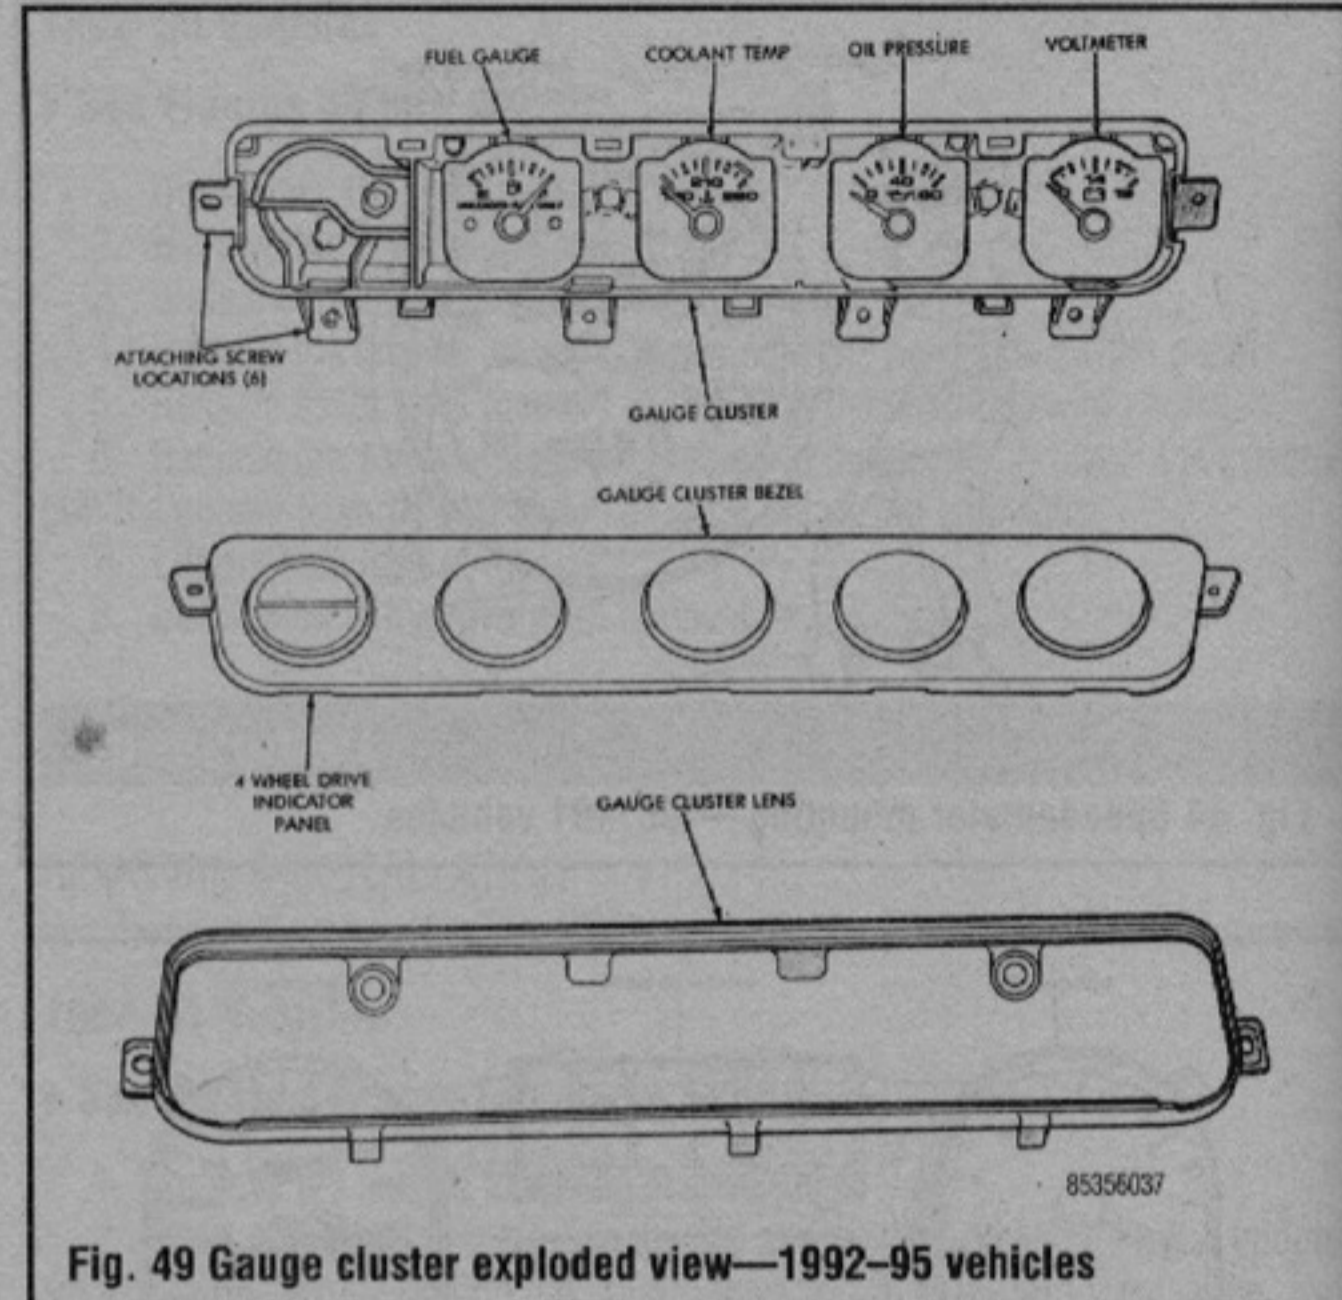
Gauge cluster exploded view—1992-95 vehicles
